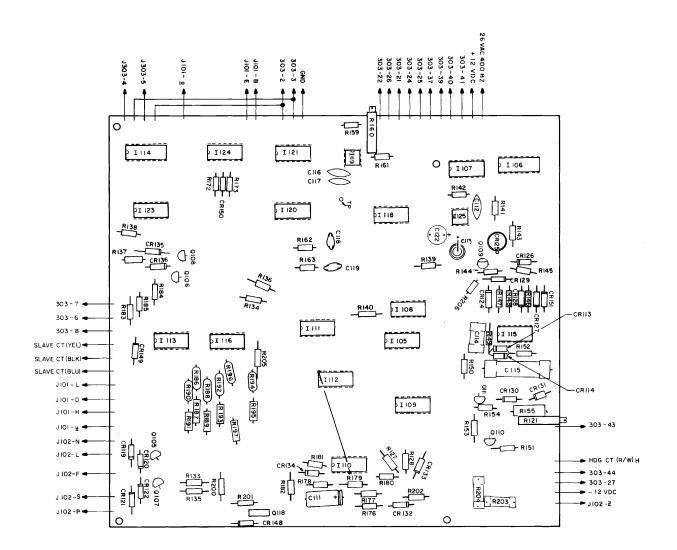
P.C. BOARD ASSEMBLY, BOARD 304, DRAWING (Dwg. 300-05988-0000 Rev. 1)
